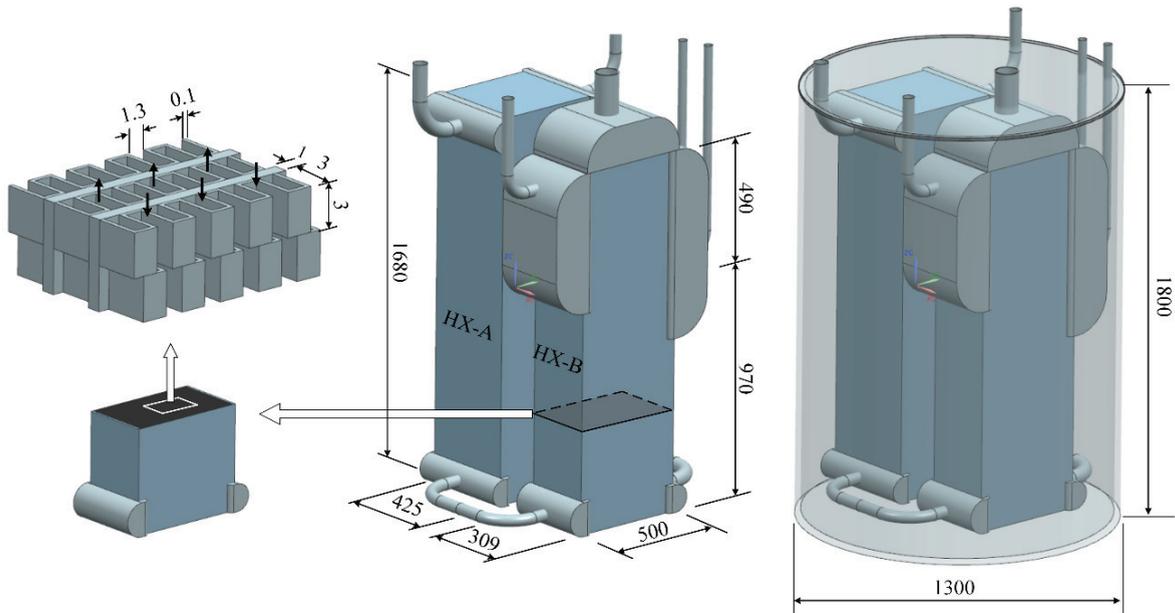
Three-dimensional drawings of plate-fins and heat exchanger assembly (unit: mm).
